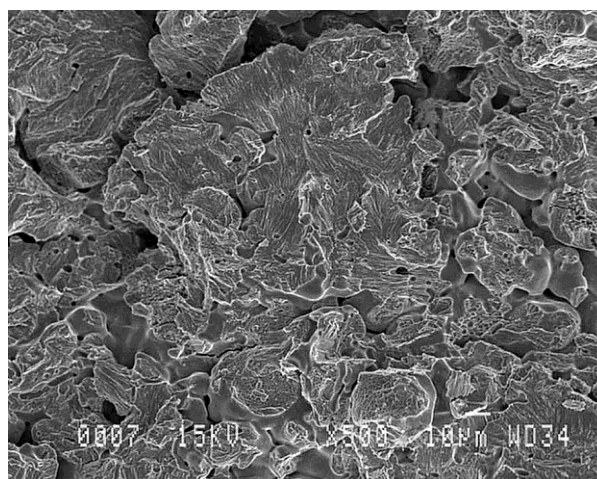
Fracture surface of the admixed PM steel at $R = 0.7$. The grains have been cut by the crack showing the transgranular fracture in some parts of the fracture surface.
